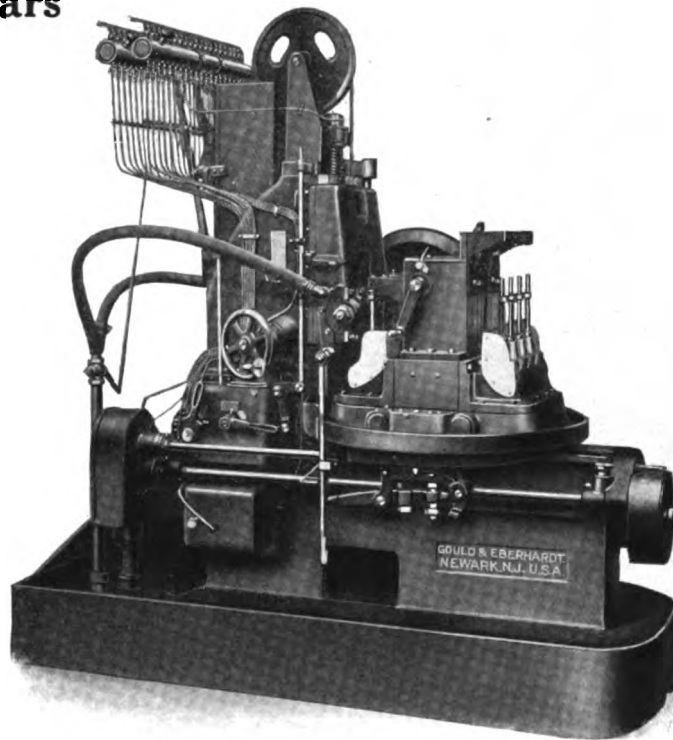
No. 36 ST—Vertical Gear Cutting Machine—Disc Cutter Type. Arranged with Spur Only Turret Work-Head
